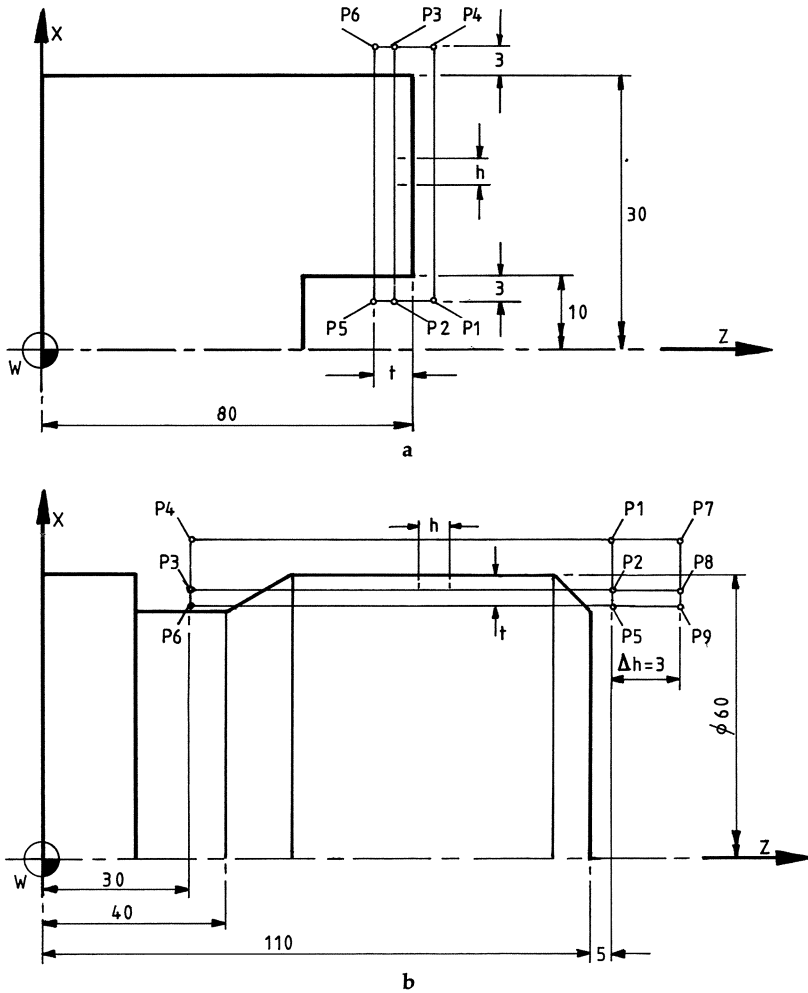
a Cutting a transversal thread. b Cutting a multiple thread. [Courtesy of Siemens.]
